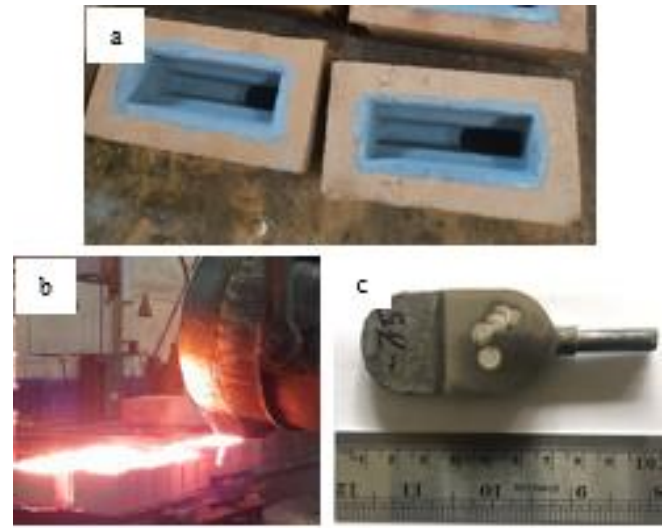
a) Y-block shape sand mold, b) molten metal poured into Y-block mold, c) specimen for chemical analysis of molten metal.
